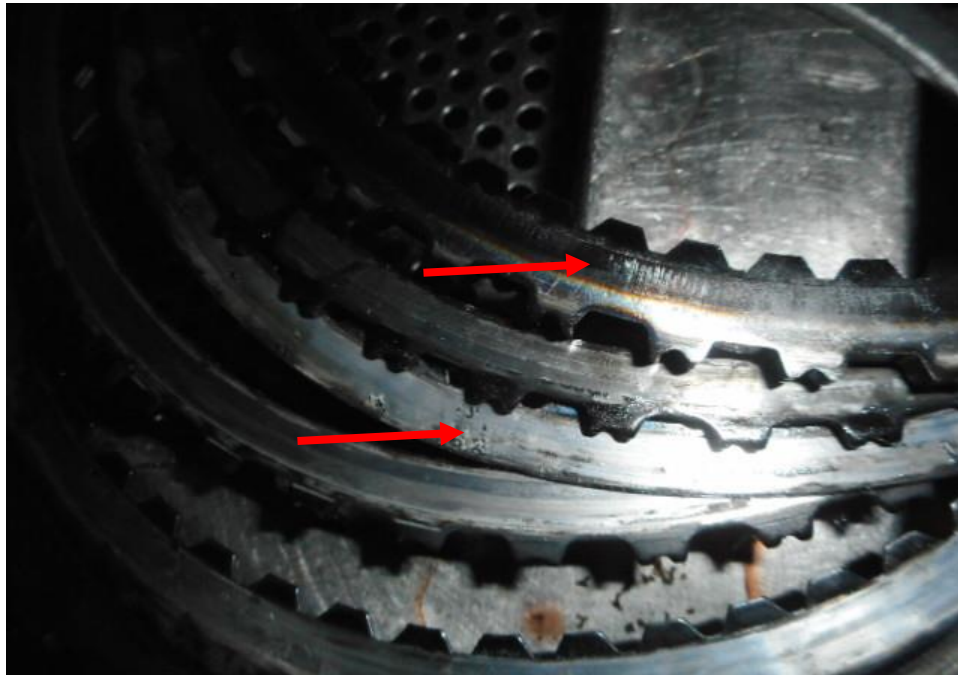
the close up view of inside the gearbox unit of the Insured Vehicle at the time of our inspection. The clutch packs (arrowed) component in the gearbox unit is observed to be damaged with scratches and friction burnt marks on the surface on the clutch packs linings, this is the cause for the complained problems of the vehicle being unable to move despite shifting into gear on the Insured Vehicle.
